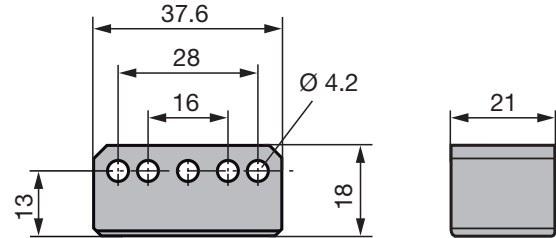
Installation dimensions of BTL6-A-3801-2 magnet
